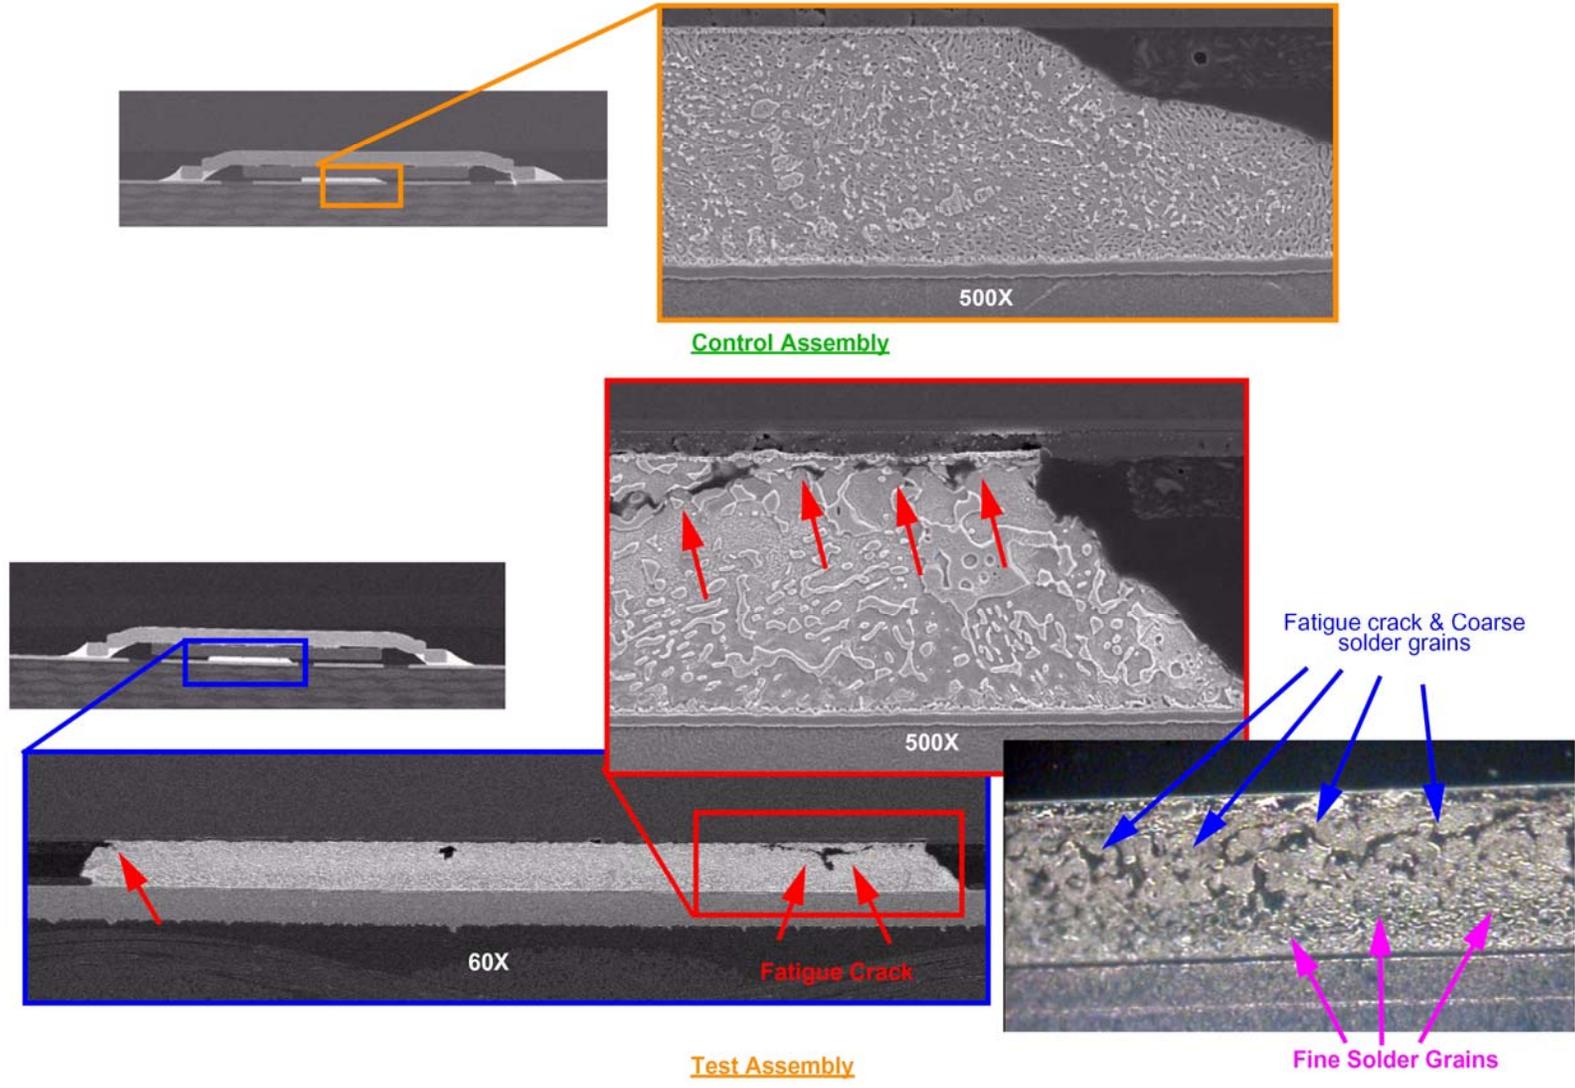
Cross-Sectional Analysis: IRF6635 Version 1 Lead-Tin Eutectic Solder
